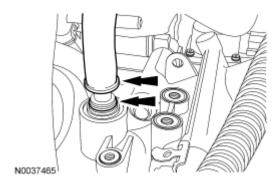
Locating Evaporative Emissions (EVAP) Tube Bundle Retaining Clip Courtesy of FORD MOTOR CO.
